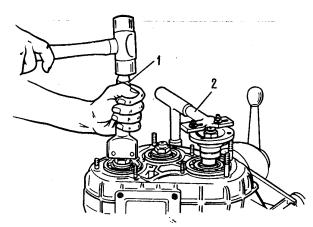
Upsetting Rear Axle Drive Shaft Flange Nut:
